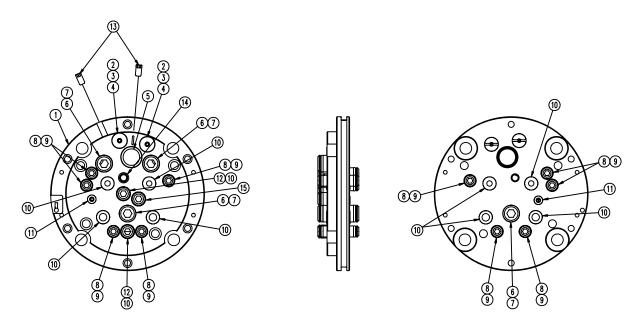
79105-01 Rear Plate Assembly (Un-Regulated Version)
